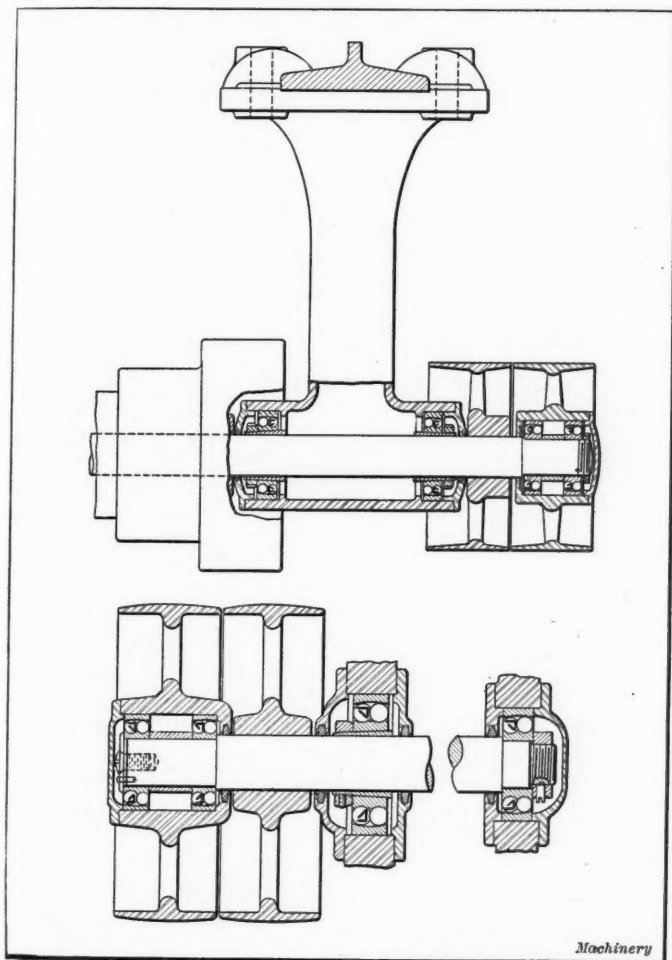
Radial Bearings on Loose Pulley Countershaft
